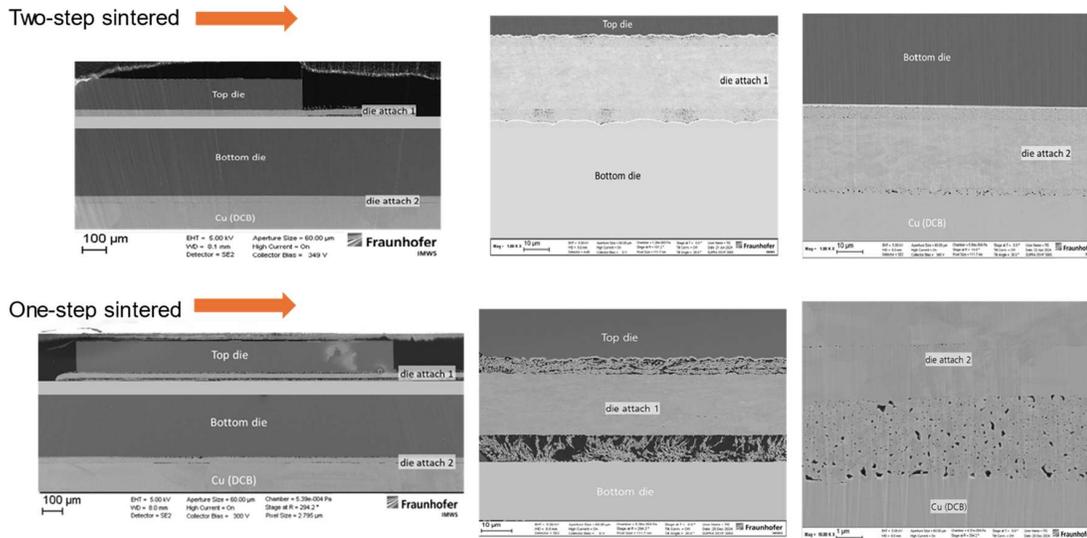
Shows overview and details of the interface of two-step and single-step fabricated die systems with KlettWelding Technology.
